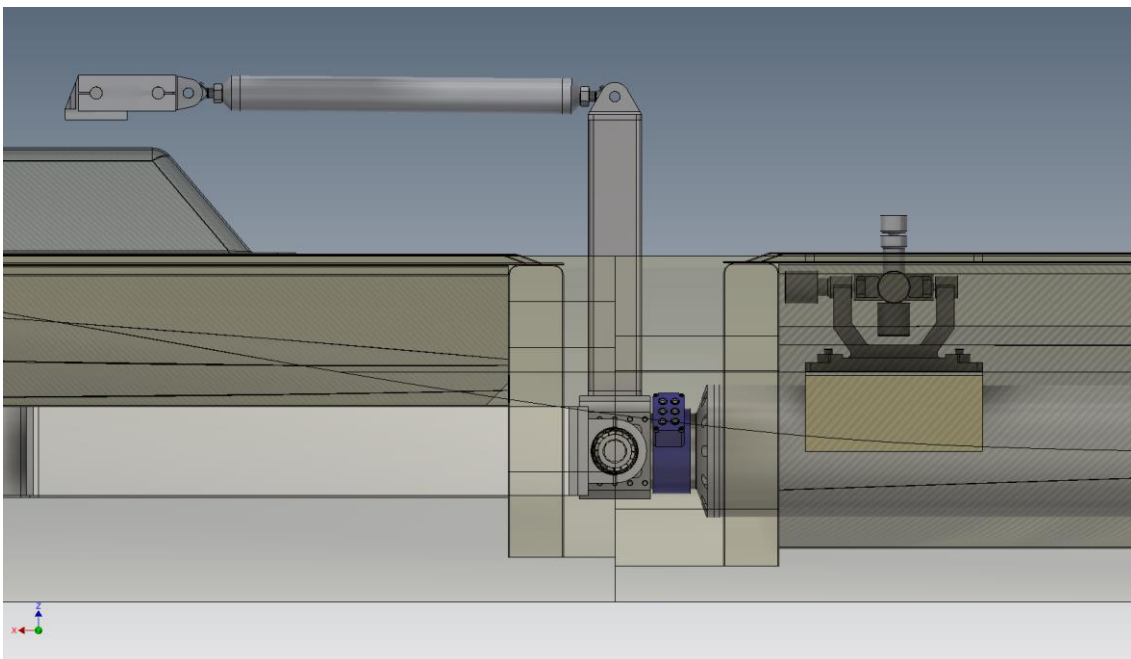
Detailed view of measurement transducer (in blue), hinged joint between segment 2 and 3 and fastener for measurement arm.
